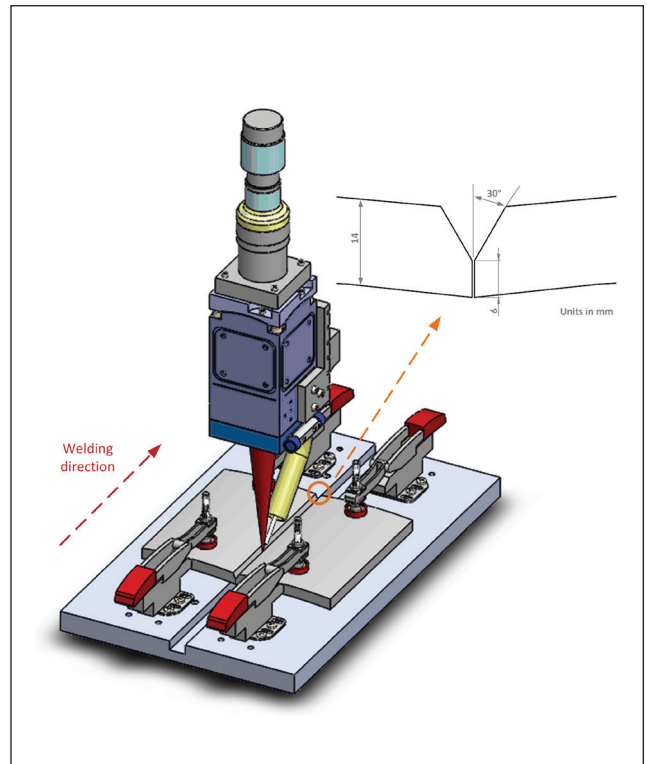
Laser welding experimental set-up with wire feed.
